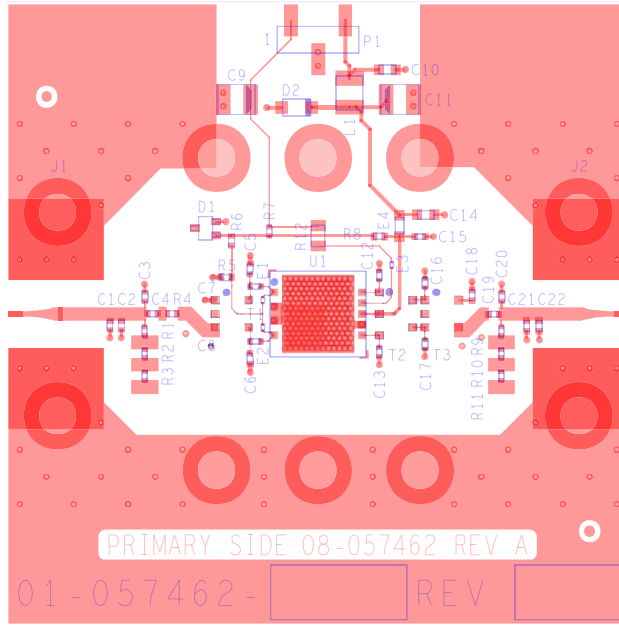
ADCA3270-EVALZ Assembly Drawing (Top Side)
